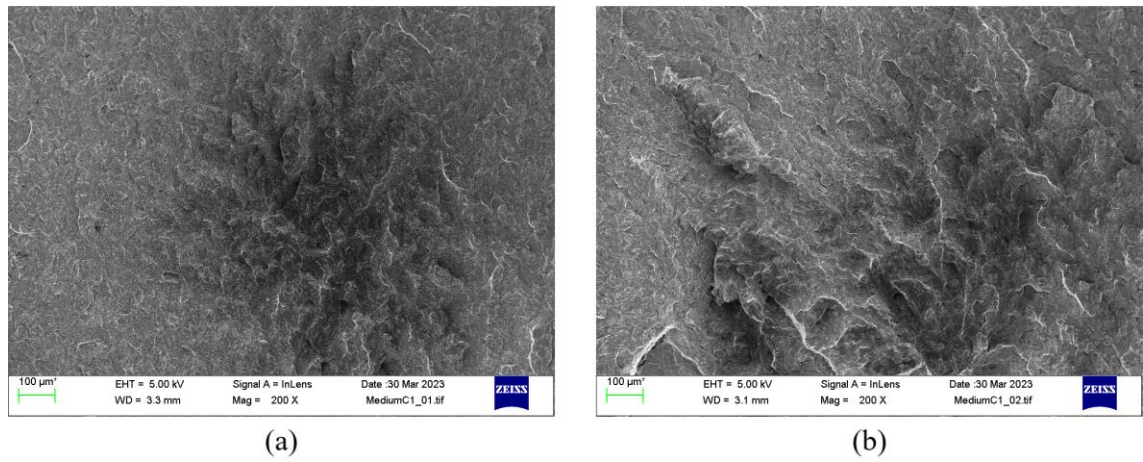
Fracture surface a) formed at the final opening of the samples and b) formed at fracture instability during fracture test.
